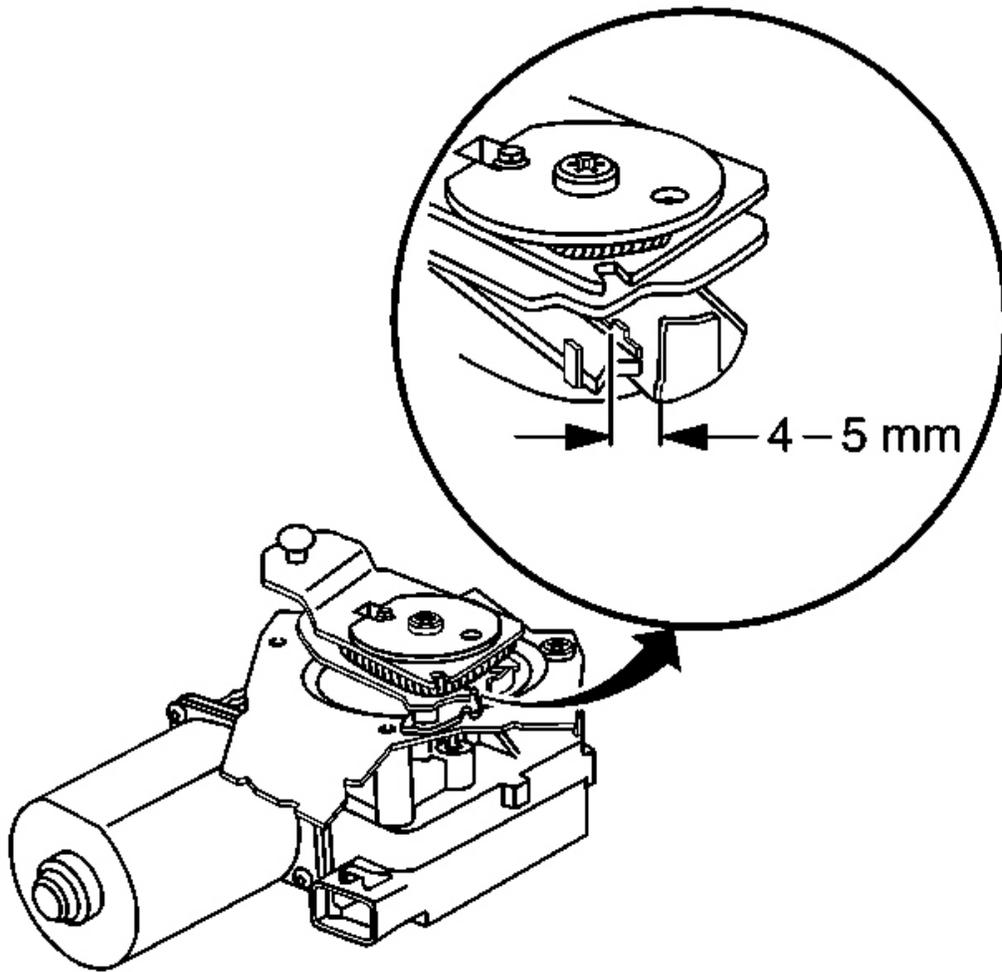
Wiper Motor Crank Arm To Wiper Motor & Park Latch
